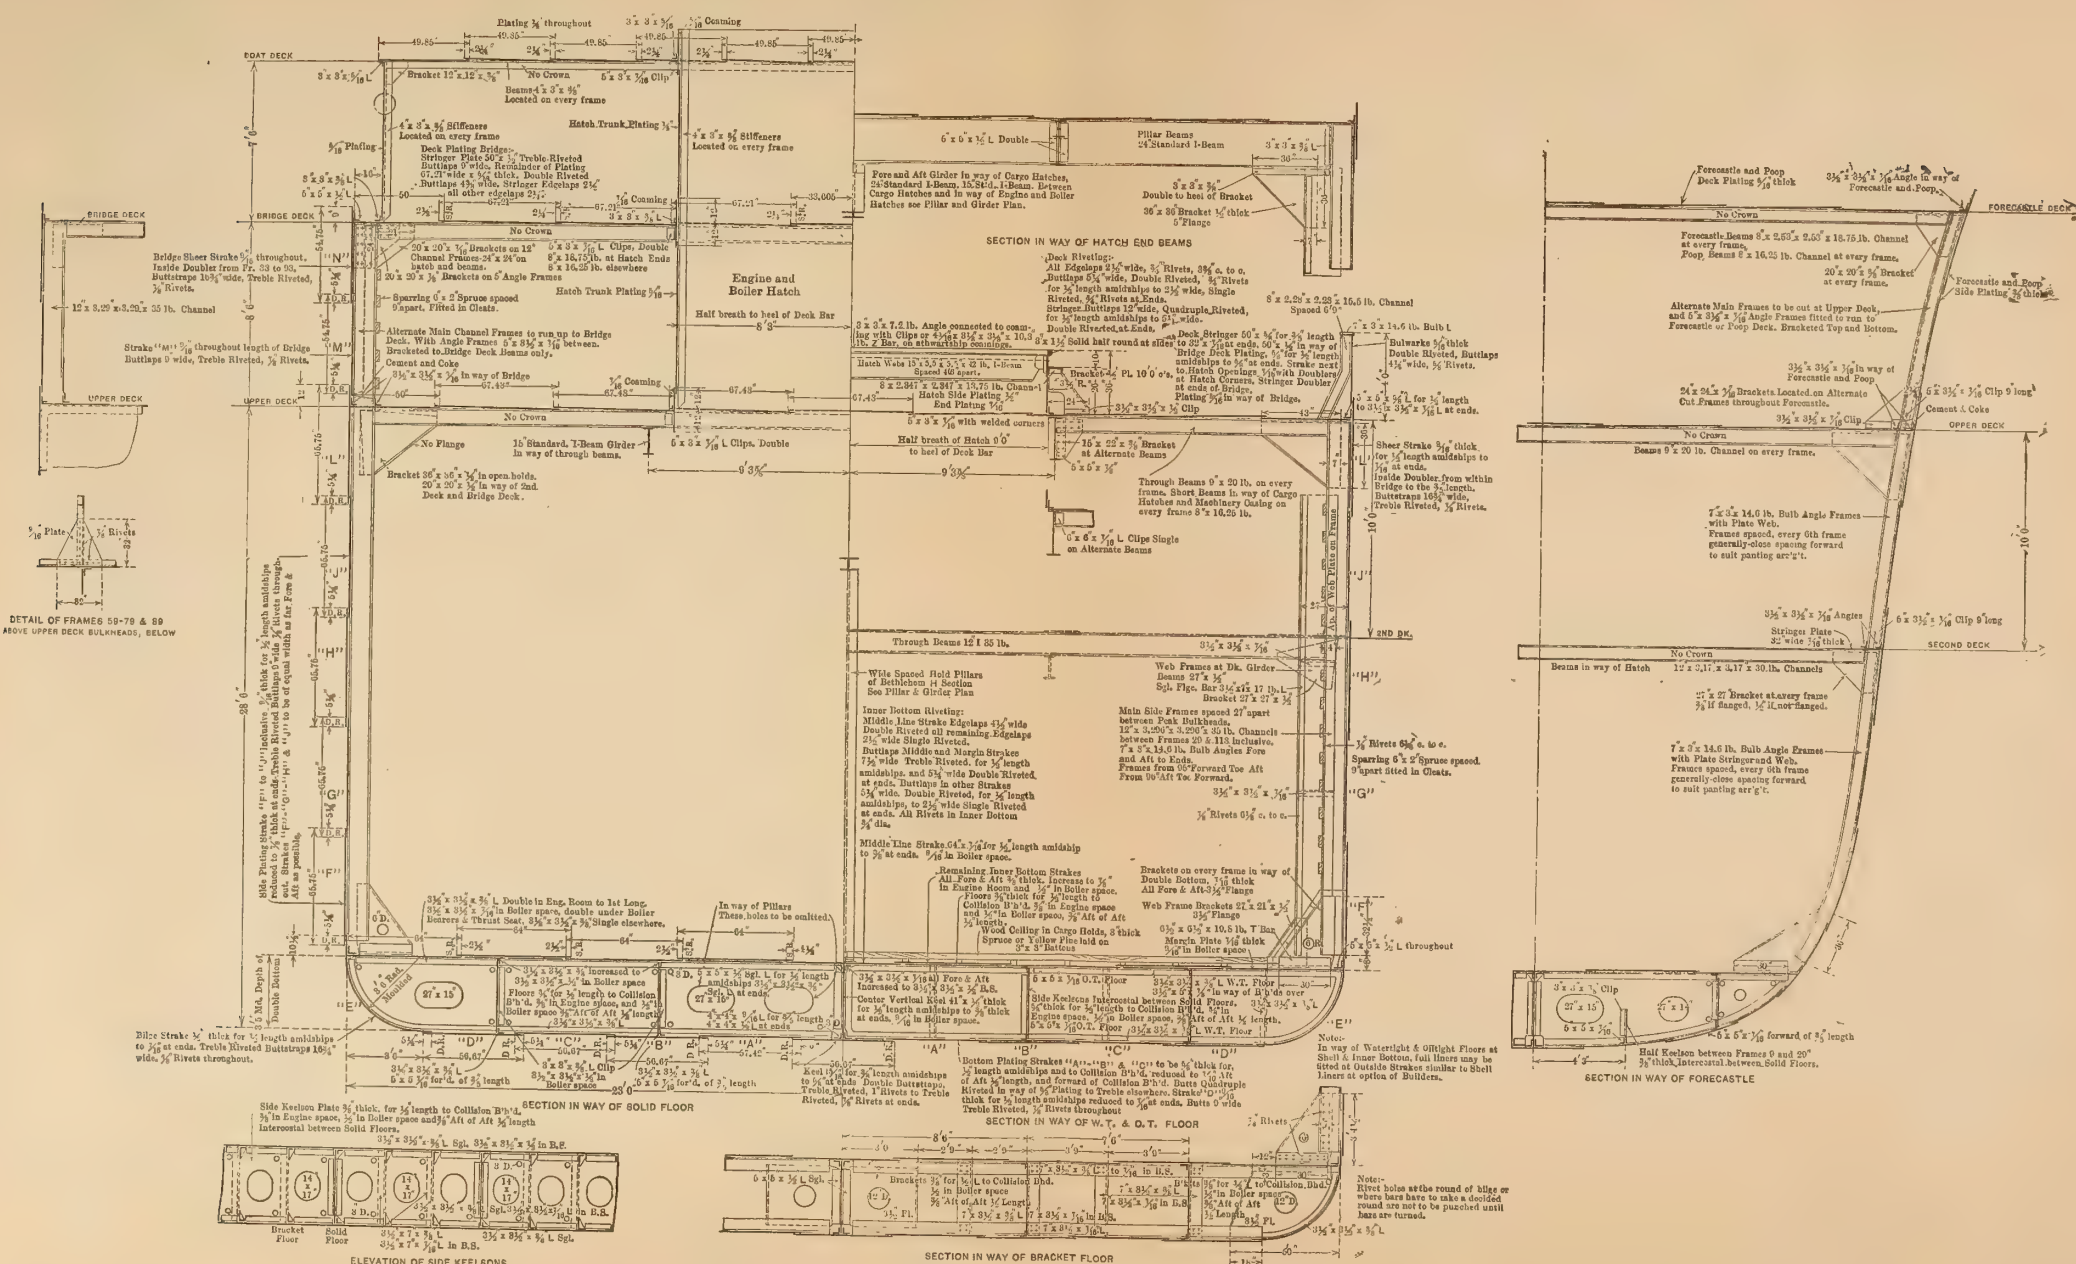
Transverse Sections, Showing Details of Hull Construction and Scantlings
